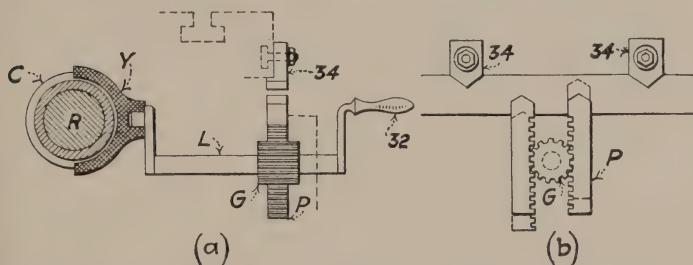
Shows principle of operation of sliding clutch member *C* in Fig. 168. The yoke *Y* fits freely in the groove in the clutch and is operated by the lever 32 (see also No. 7 Fig. 166). Fastened to the lever shaft *L* is the gear *G* that lies between two plungers *P* which are provided with rack teeth as shown in (b). When lever is in a vertical position the clutch *C* is neutral. When *C* is moved to engage either bevel gear (Fig. 168) one plunger is raised and the other is depressed as shown by dotted lines (b, Fig. 169). As the table feeds and the dog 34 comes against and pushes down the plunger *P*, it turns the gear *G* which serves to move the lever *L* and the yoke *Y* and thus disengage the clutch.
